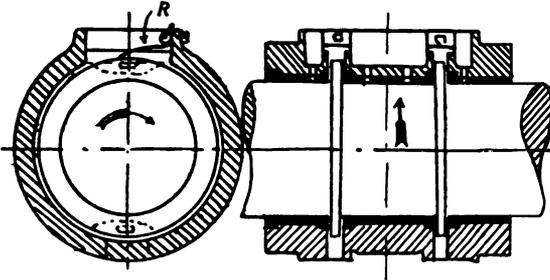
Bearing for Shaft with two fixed Oiling Rings.
